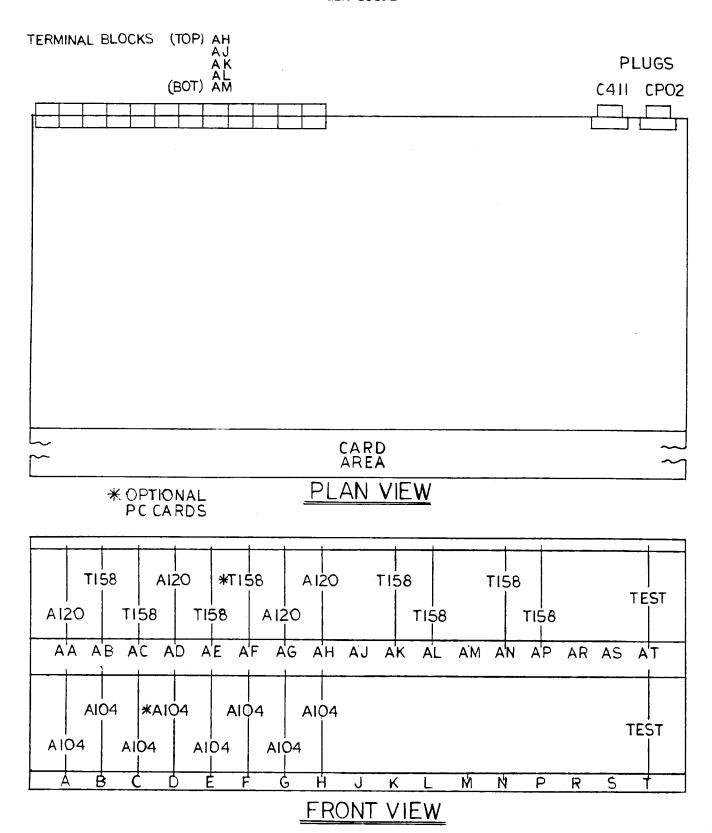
(0285A6222-0) Component and Printed Circuit Card Location Diagram for Type SLA56D Relay
